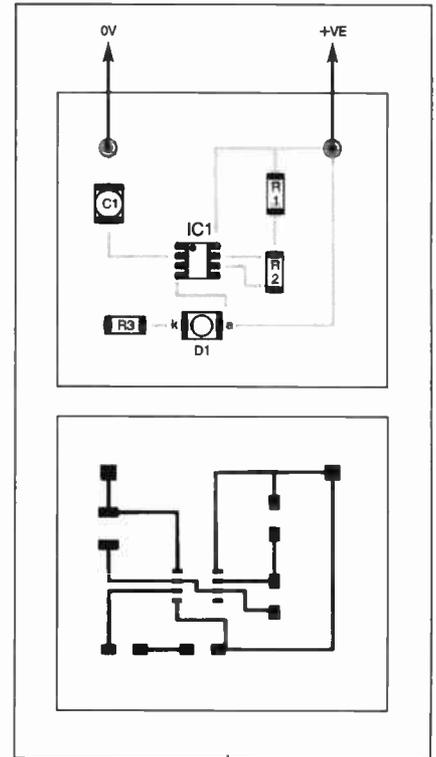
Component and track layout for the suggested demonstration p.c.b.
